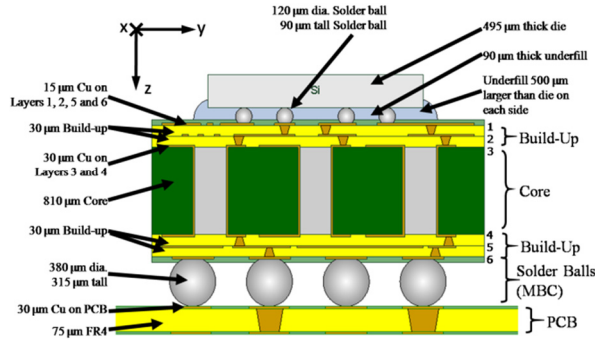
General cross-sectional view of the sample six-layer IC package with the underlying sample PCB.
